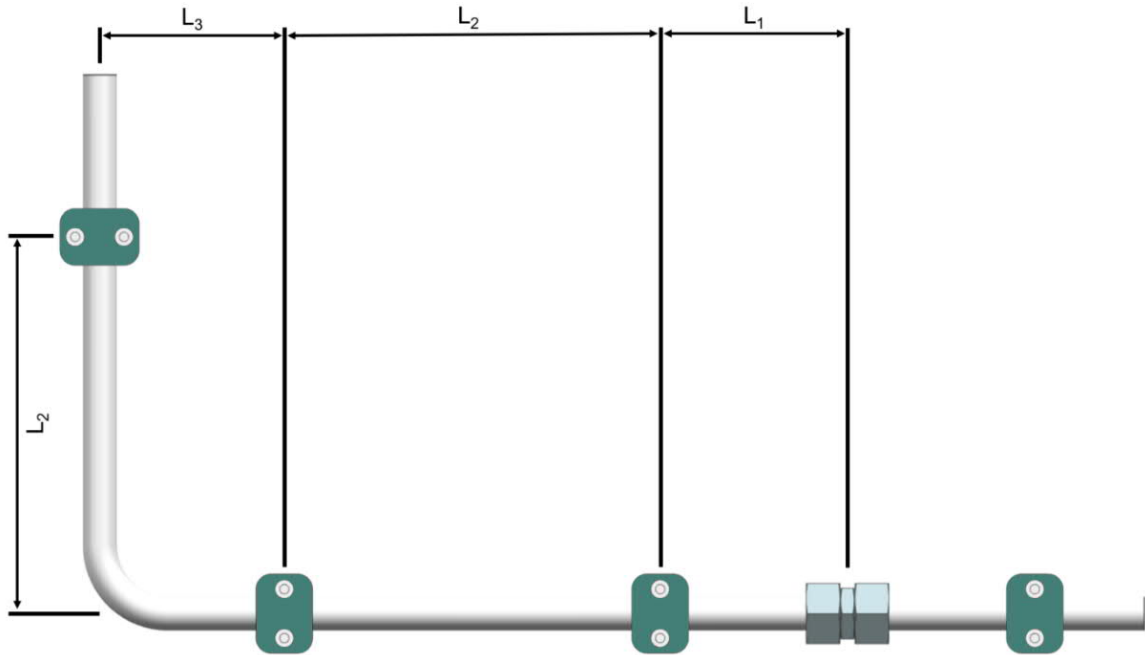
Spacing distance for fastening clamps (adapted from ISO 4413 2010, p.20).
